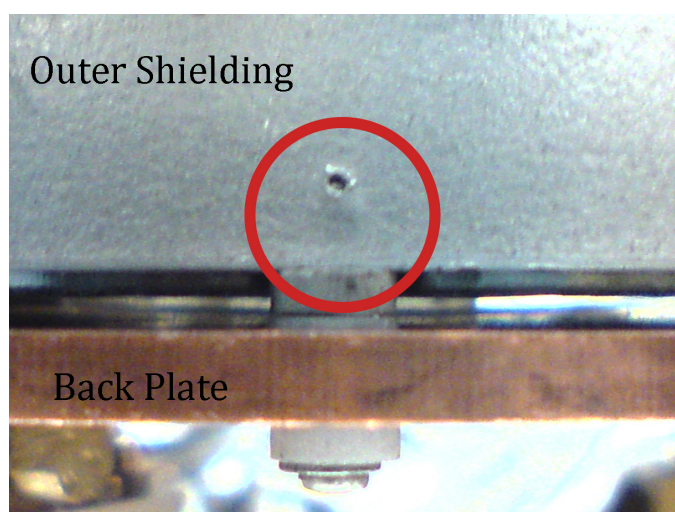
View of the current HGRFA outer shielding to show the bulging of the aluminum caused by re-tapping stripped threads.
